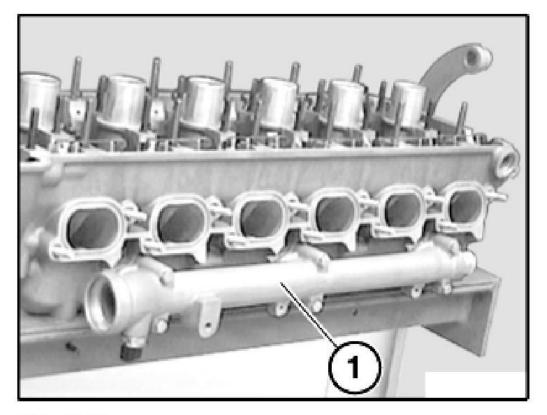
Securing Cylinder Head To Special Tool Courtesy of BMW OF NORTH AMERICA, INC.
